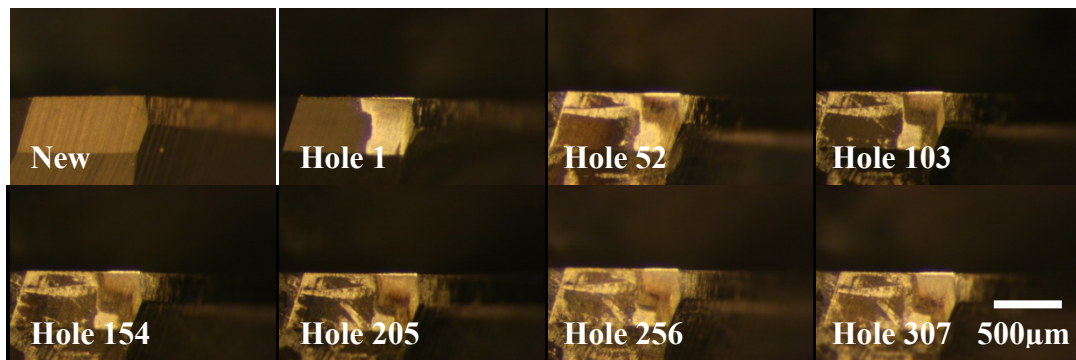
Tool wear micrographs of Graphit-iC™ reamer under 70bar through-hole cutting fluid, 96m/min cutting speed (Test 4)
